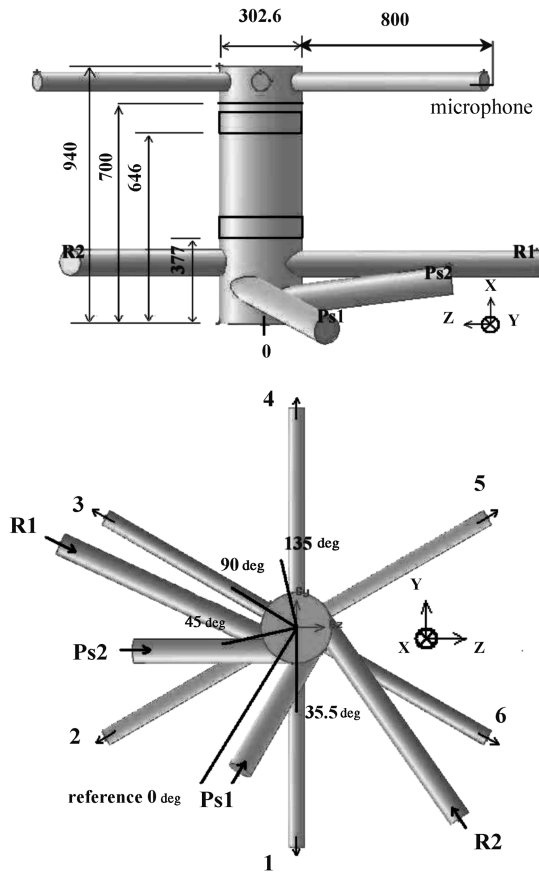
Mixing manifold prototype (scale 0.445, size in mm), front and bottom views.
